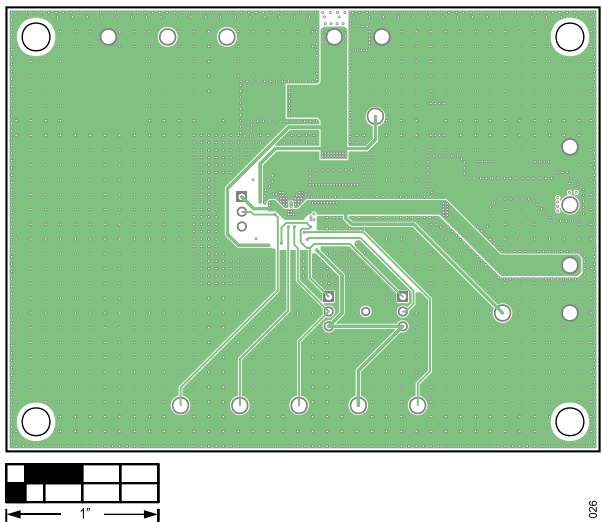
LT80603EVKIT# PCB Layout—Layer 3
